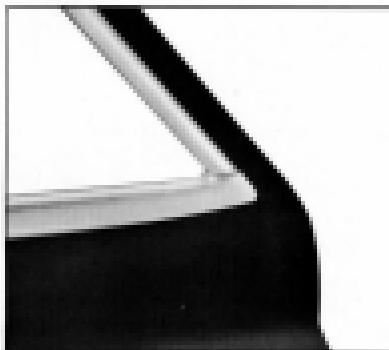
'80 Sedan: Front Door Reveal Molding Junction
